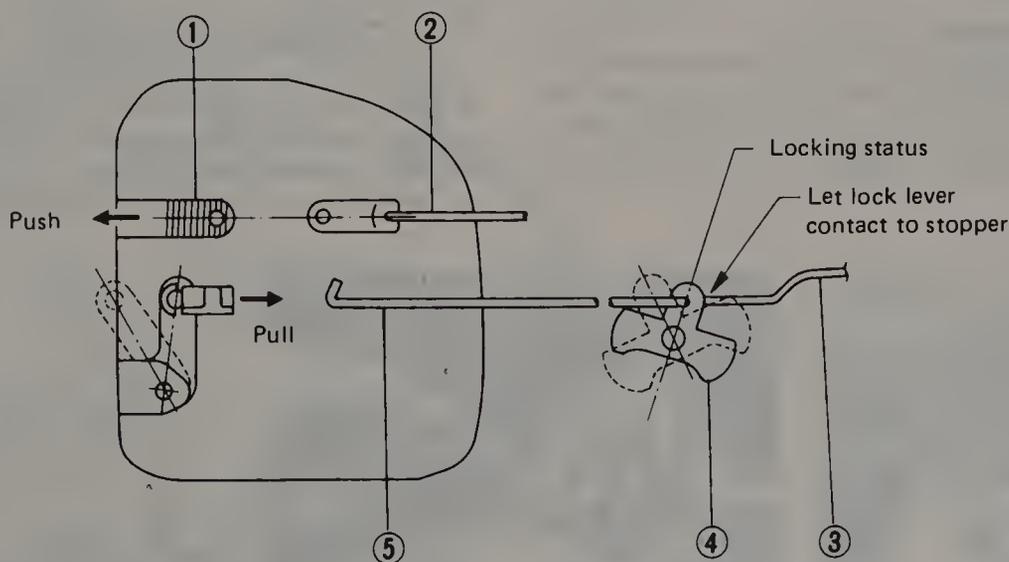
Door latch and lock adjusting details (Sec 13)
